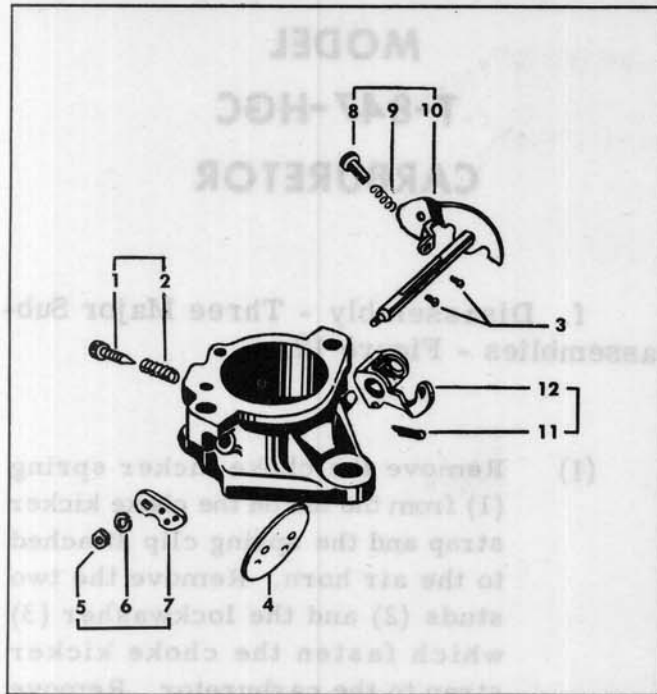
DISASSEMBLY – THROTTLE BODY
